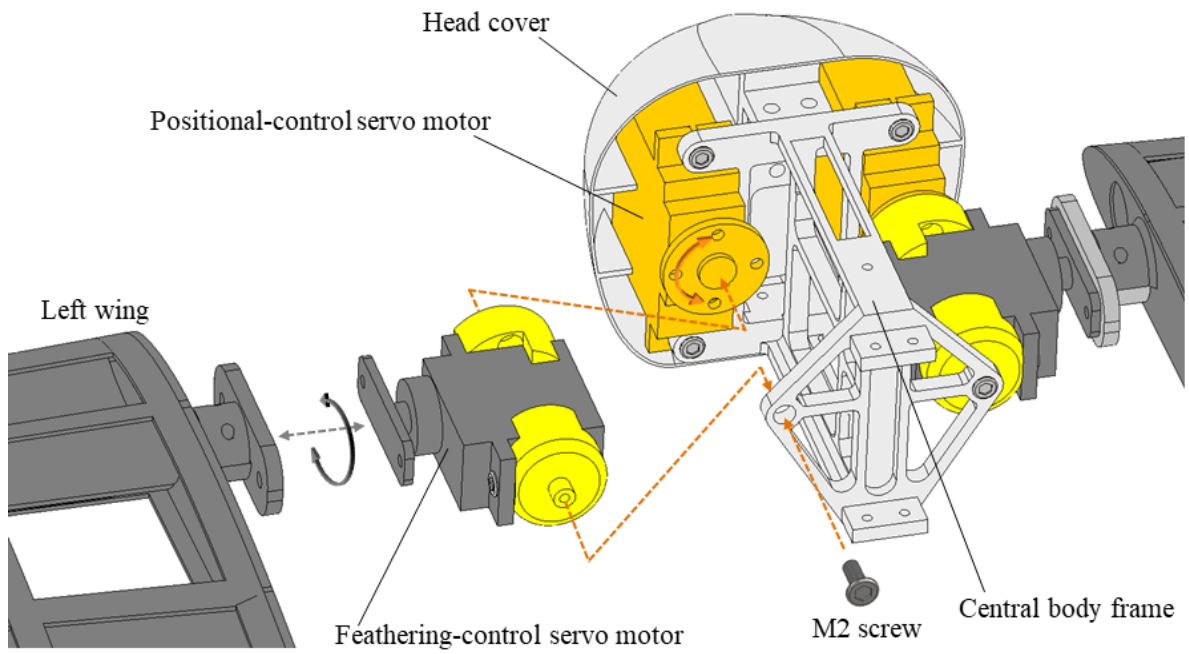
Schematic diagram of the wing actuation mechanism assembly.
